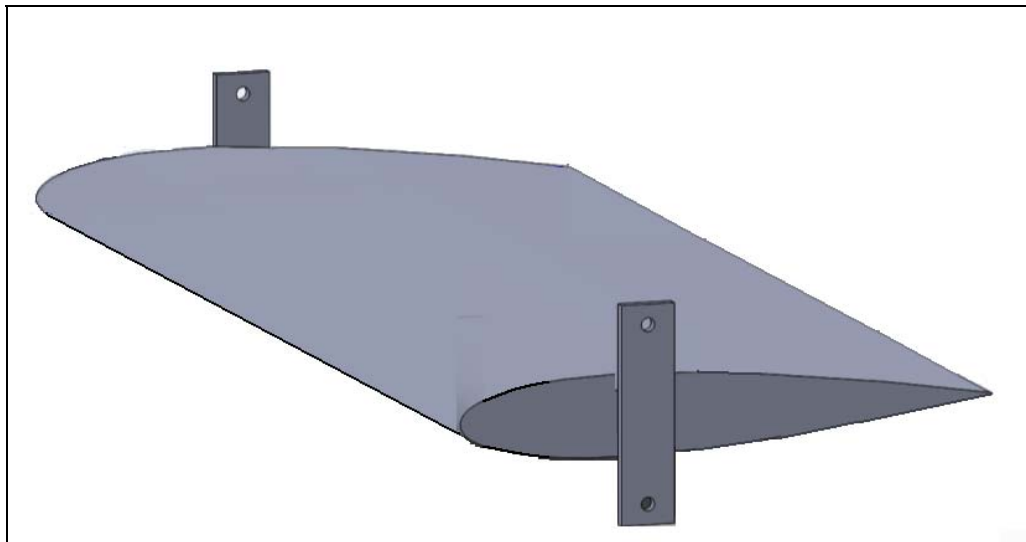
SOLIDWORKS assembly drawing of the airfoil and plate support
